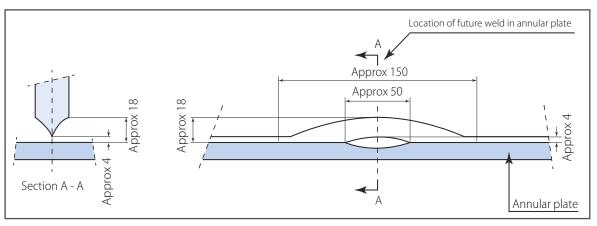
'K' seam where new annular plate radial welds cross rank shell
